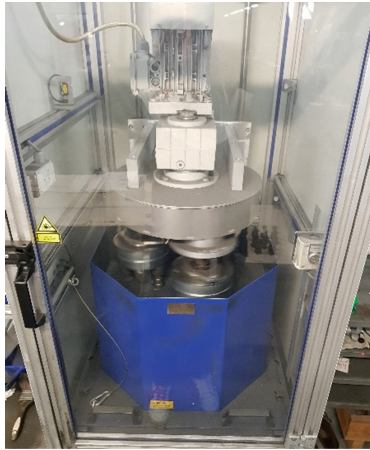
Process of drag finishing on OTEC DF-3 Tools
